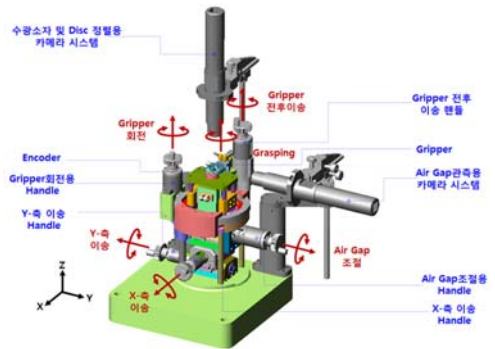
Proposed Precision Assembly JIG Mechanism for Rotational Sensor
